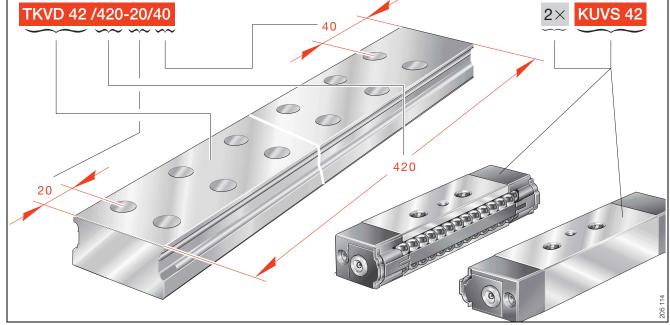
· Ordering example, linear recirculating ball bearing units with guideway
